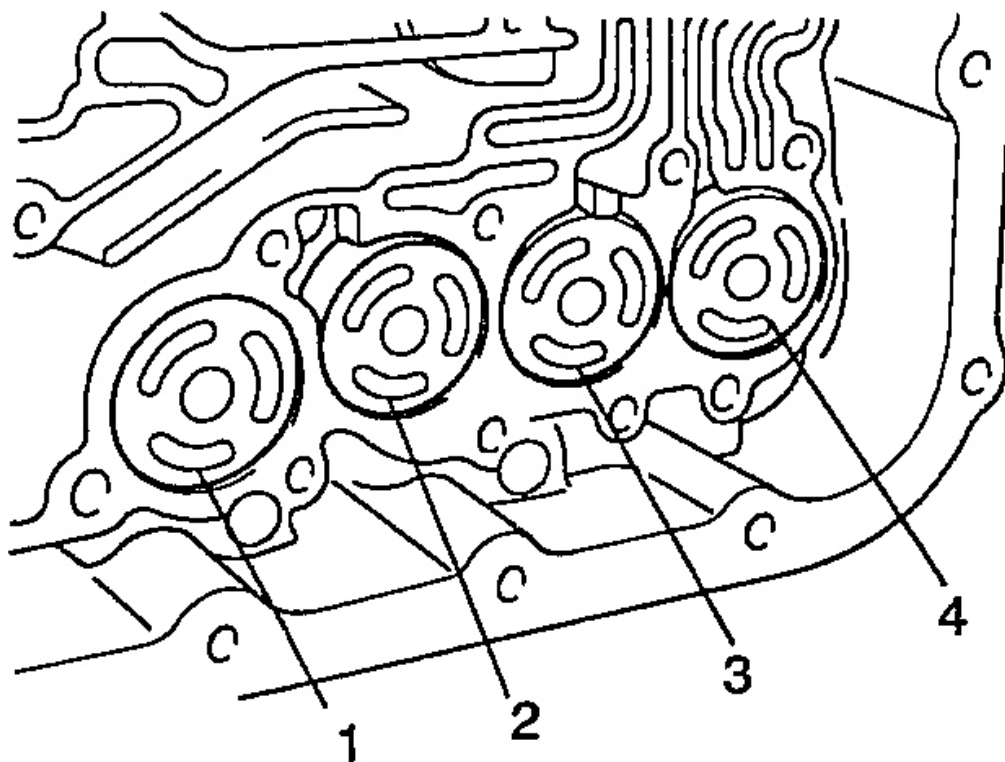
Removing Second Brake Retainer Oil Seal
